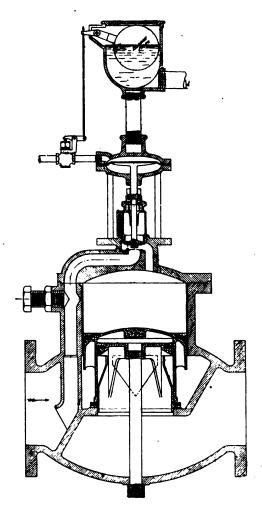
g.—Sectional View of Gulland Automatic Valve Equipped with Float Valve.
